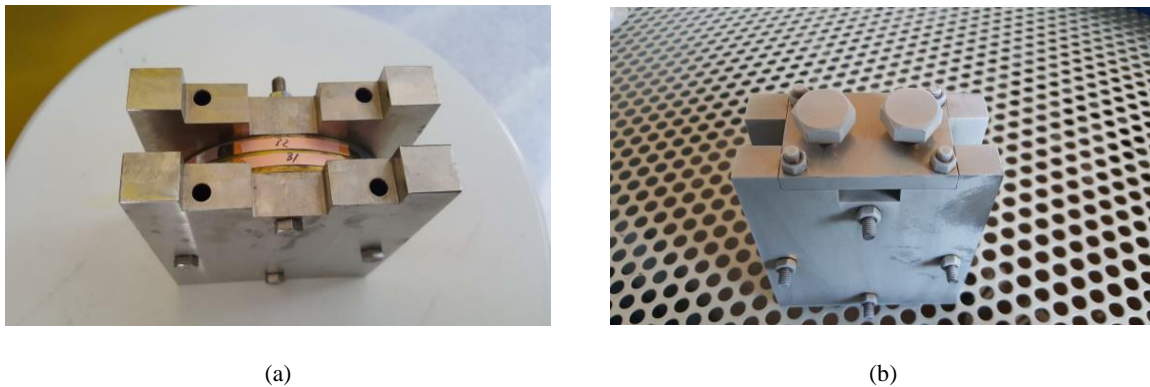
Stainless-steel holder for soldering of superconducting rings. a) Interior detail with two tapes wound. b) Assembled device prepared for soldering.
